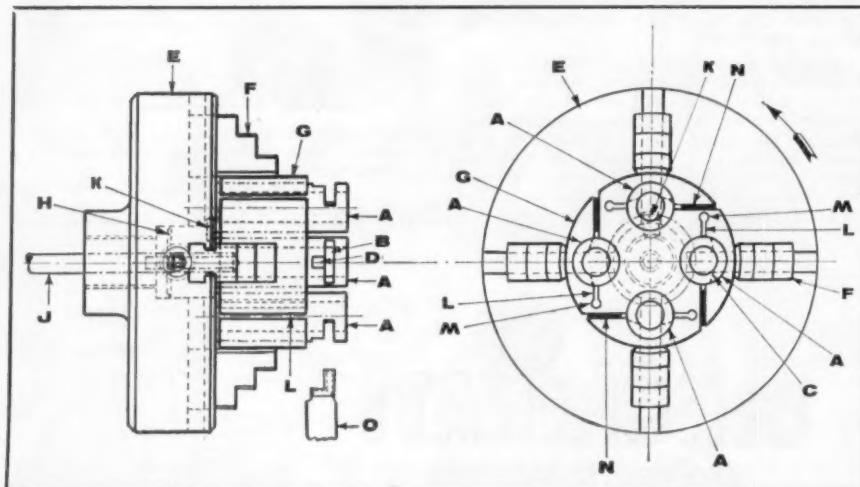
Drawing of lathe chuck modified for holding several sleeve type components of the design shown in Fig. 2 while machining grooves and flats therein simultaneously using a single cutter.
